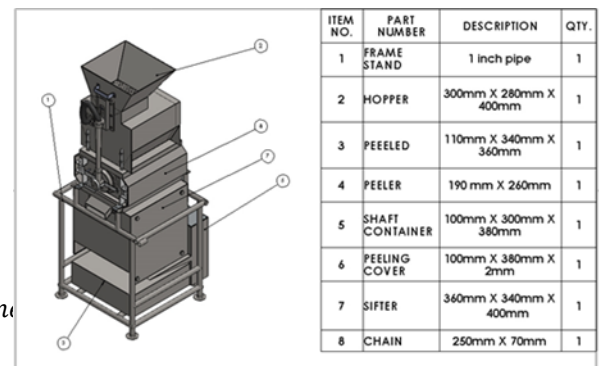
CAD designed drawing of the groundnut peeling equipment showing its parts.
